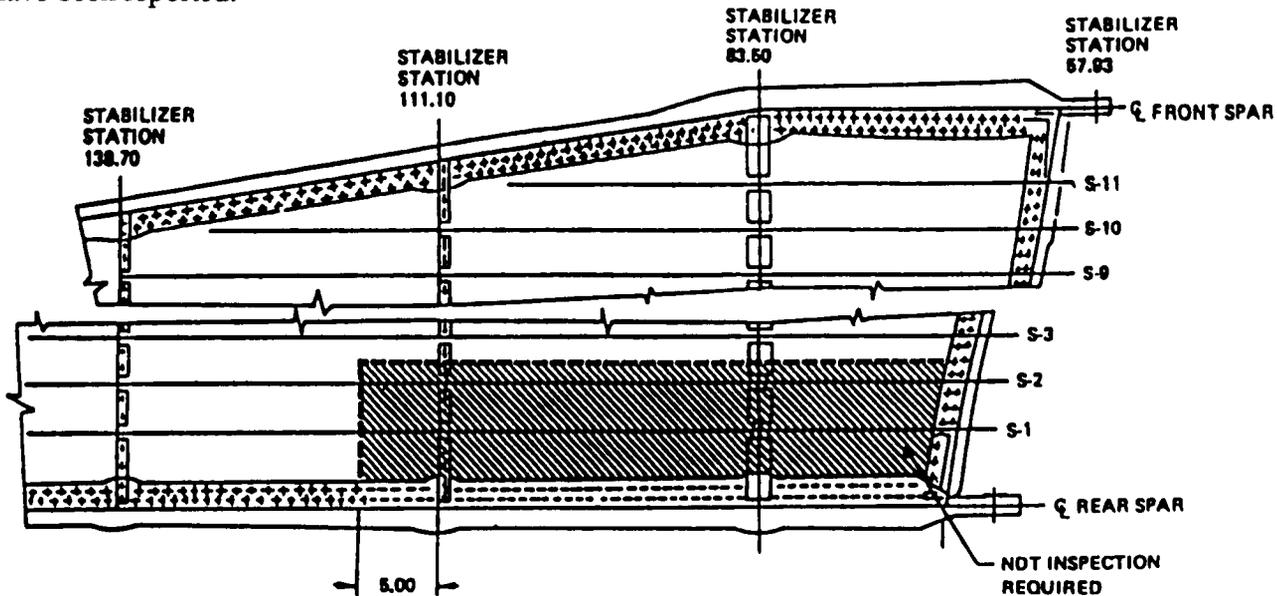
Upper and Lower Skin Panel NDT Inspection Requirements
